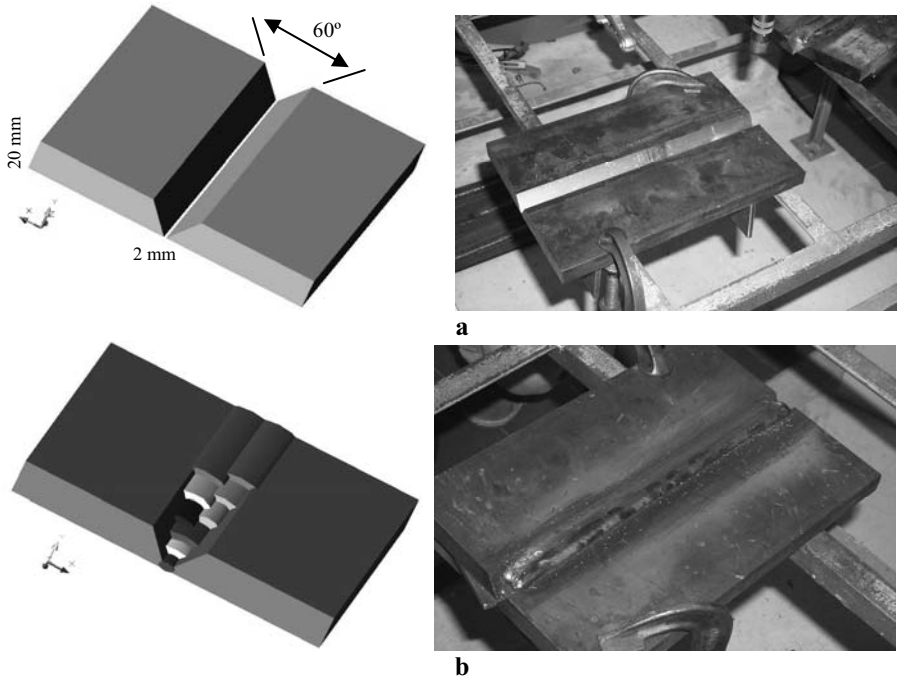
a, b. Aspect of the working object, welding sequence and obtained weld: a – work-piece for multi-pass weld test case (two 20 mm thick plates, 2 mm apart from each other, with a 60° V-groove joint preparation); b - layers necessary (welding sequence) to finish the weld and obtained weld
